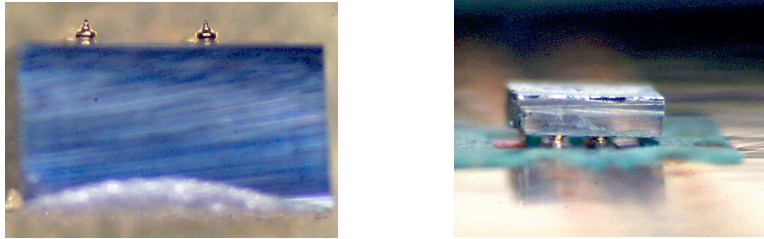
Side view of gold stud bumps attached to the die pads (left). Flip-chipped MOSFET die on printed circuit board (right).
